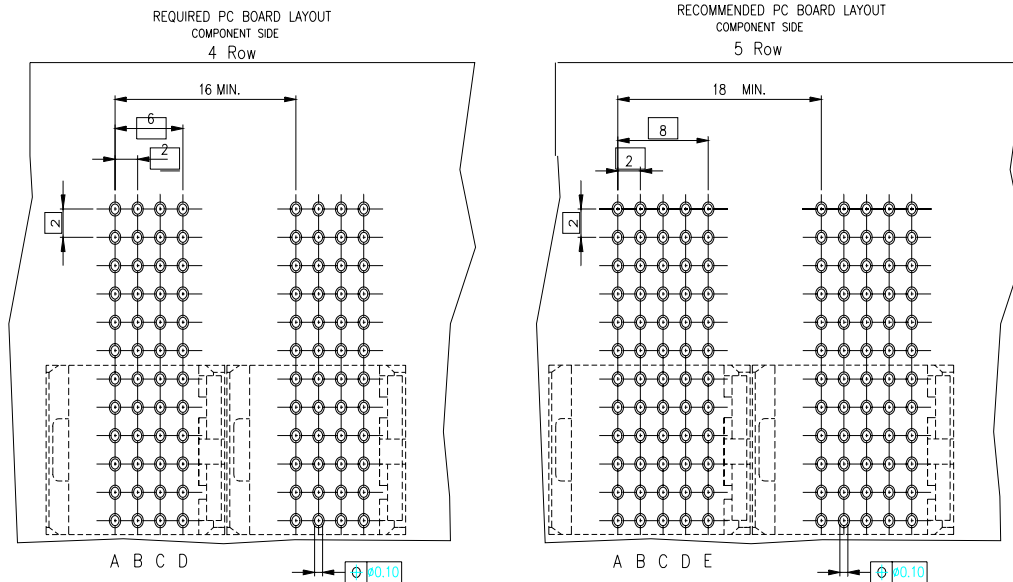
Required board layout for press fit vertical header. (All dimensions in mm)
